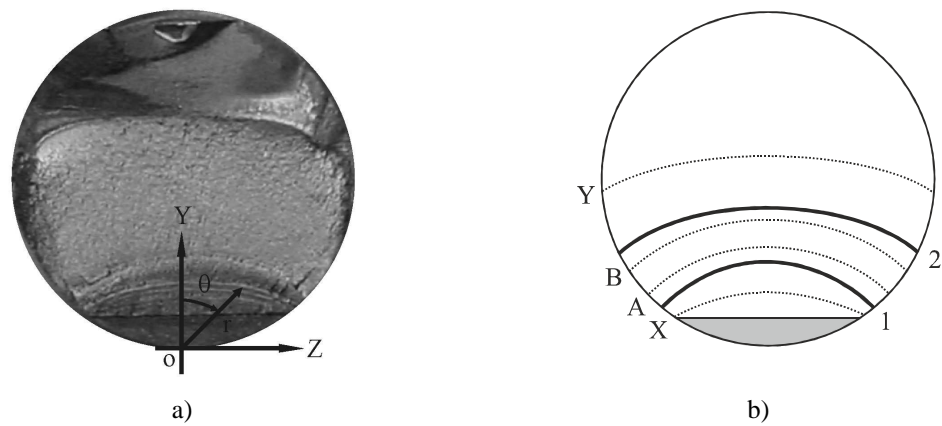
a) Fracture surface (initial crack of 1.0mm, 25kN cyclic tension loading); b) sketch of the visible crack fronts used (Branco, 2012d).
